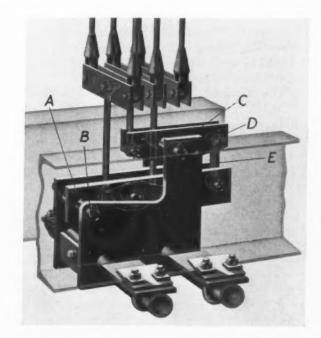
Levers serve to equalize the six cables of an elevator hoist
